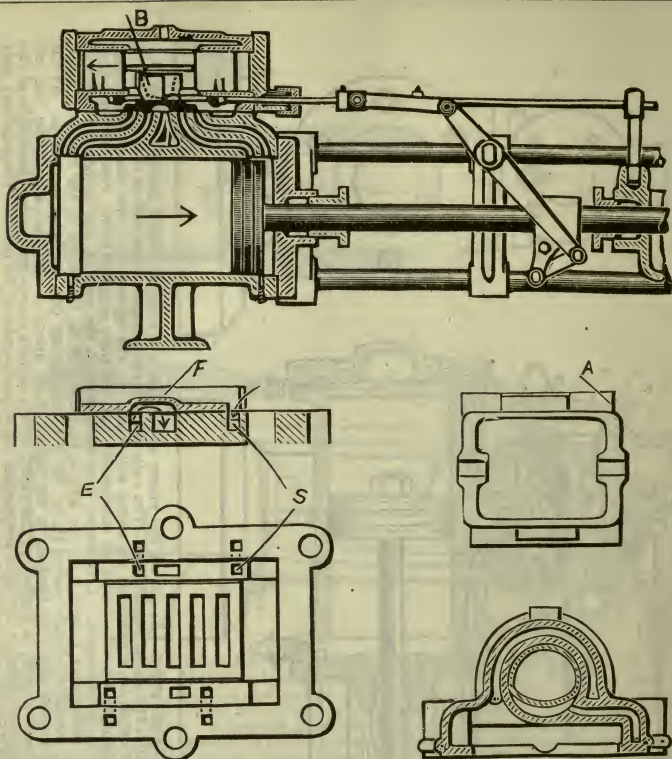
and 735.—Valve gear of the *Snow* pump. The auxiliary valve is a plain flat slide operated by a valve stem, the latter being moved back and forth by means of a rocker shaft, as shown, the upper end of which alternately comes in contact with the collars on the stem. The outer end of the valve stem passes through a sleeve attached to a pin in the upper end of the rocker arm, as shown. A knuckle joint near the stuffing box permits the rod to vibrate without causing any derangement in the alignment of valve stem through the stuffing boxes. On the valve stem at either end of the auxiliary valve is a spring, which tends to keep the valve in a central position, so that when the rocker arm engages one of the collars, the valve is drawn against the spring toward that end of the stroke. The result is that the stem and valve follow the rocker arm on the return stroke to its mid-position, and are started on the latter half of the stroke by the stem, but without shock or lost motion. This arrangement is particularly valuable in the case of condensers, and in pumps where the first part of the stroke is made quickly, and the piston is then suddenly stopped by coming in contact with a solid body of water, the latter part of the stroke being made much more slowly. The springs on either side of the auxiliary valve take up lost motion and keep the parts in contact, thus preventing shocks and unnecessary wear.
